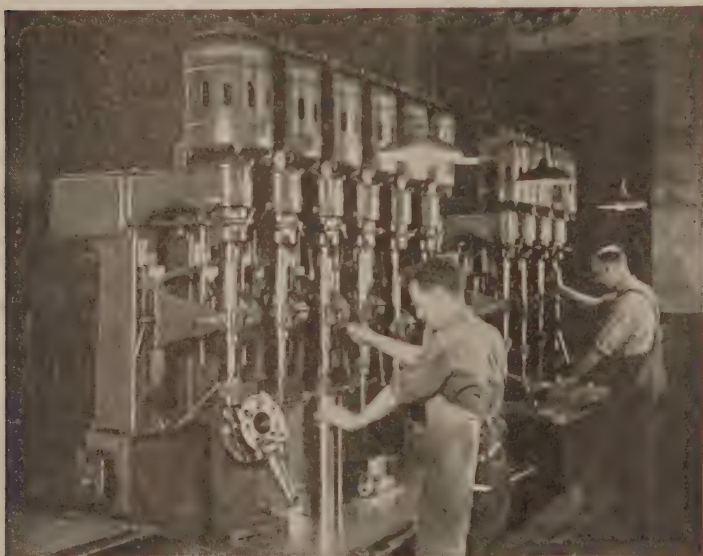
A battery of drills in a manufacturing department. (*Courtesy of The Taft-Pierce Manufacturing Company.*)
